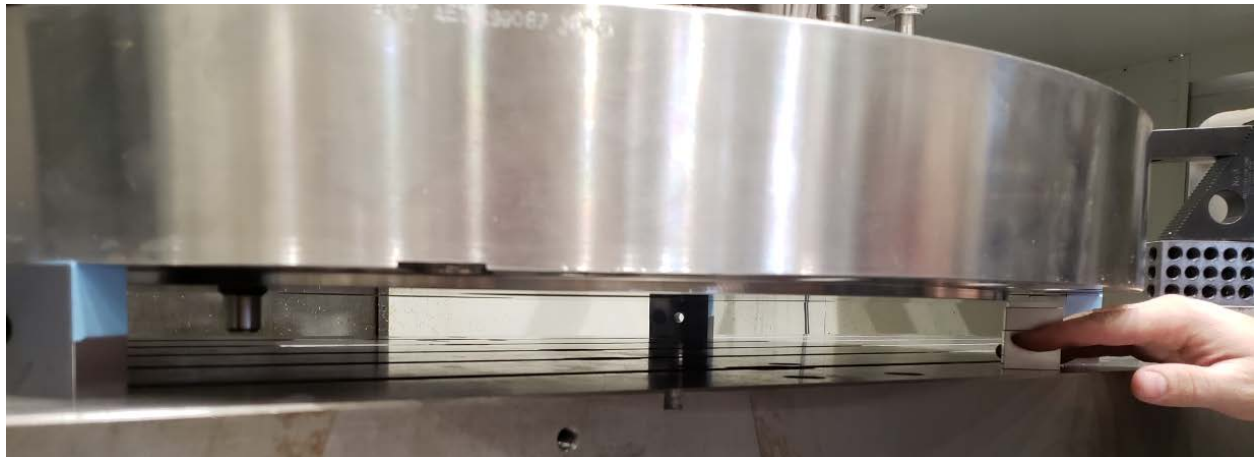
Confirming flatness of primary flange raised face to ensure parallelism with CNC mill x-y plane
